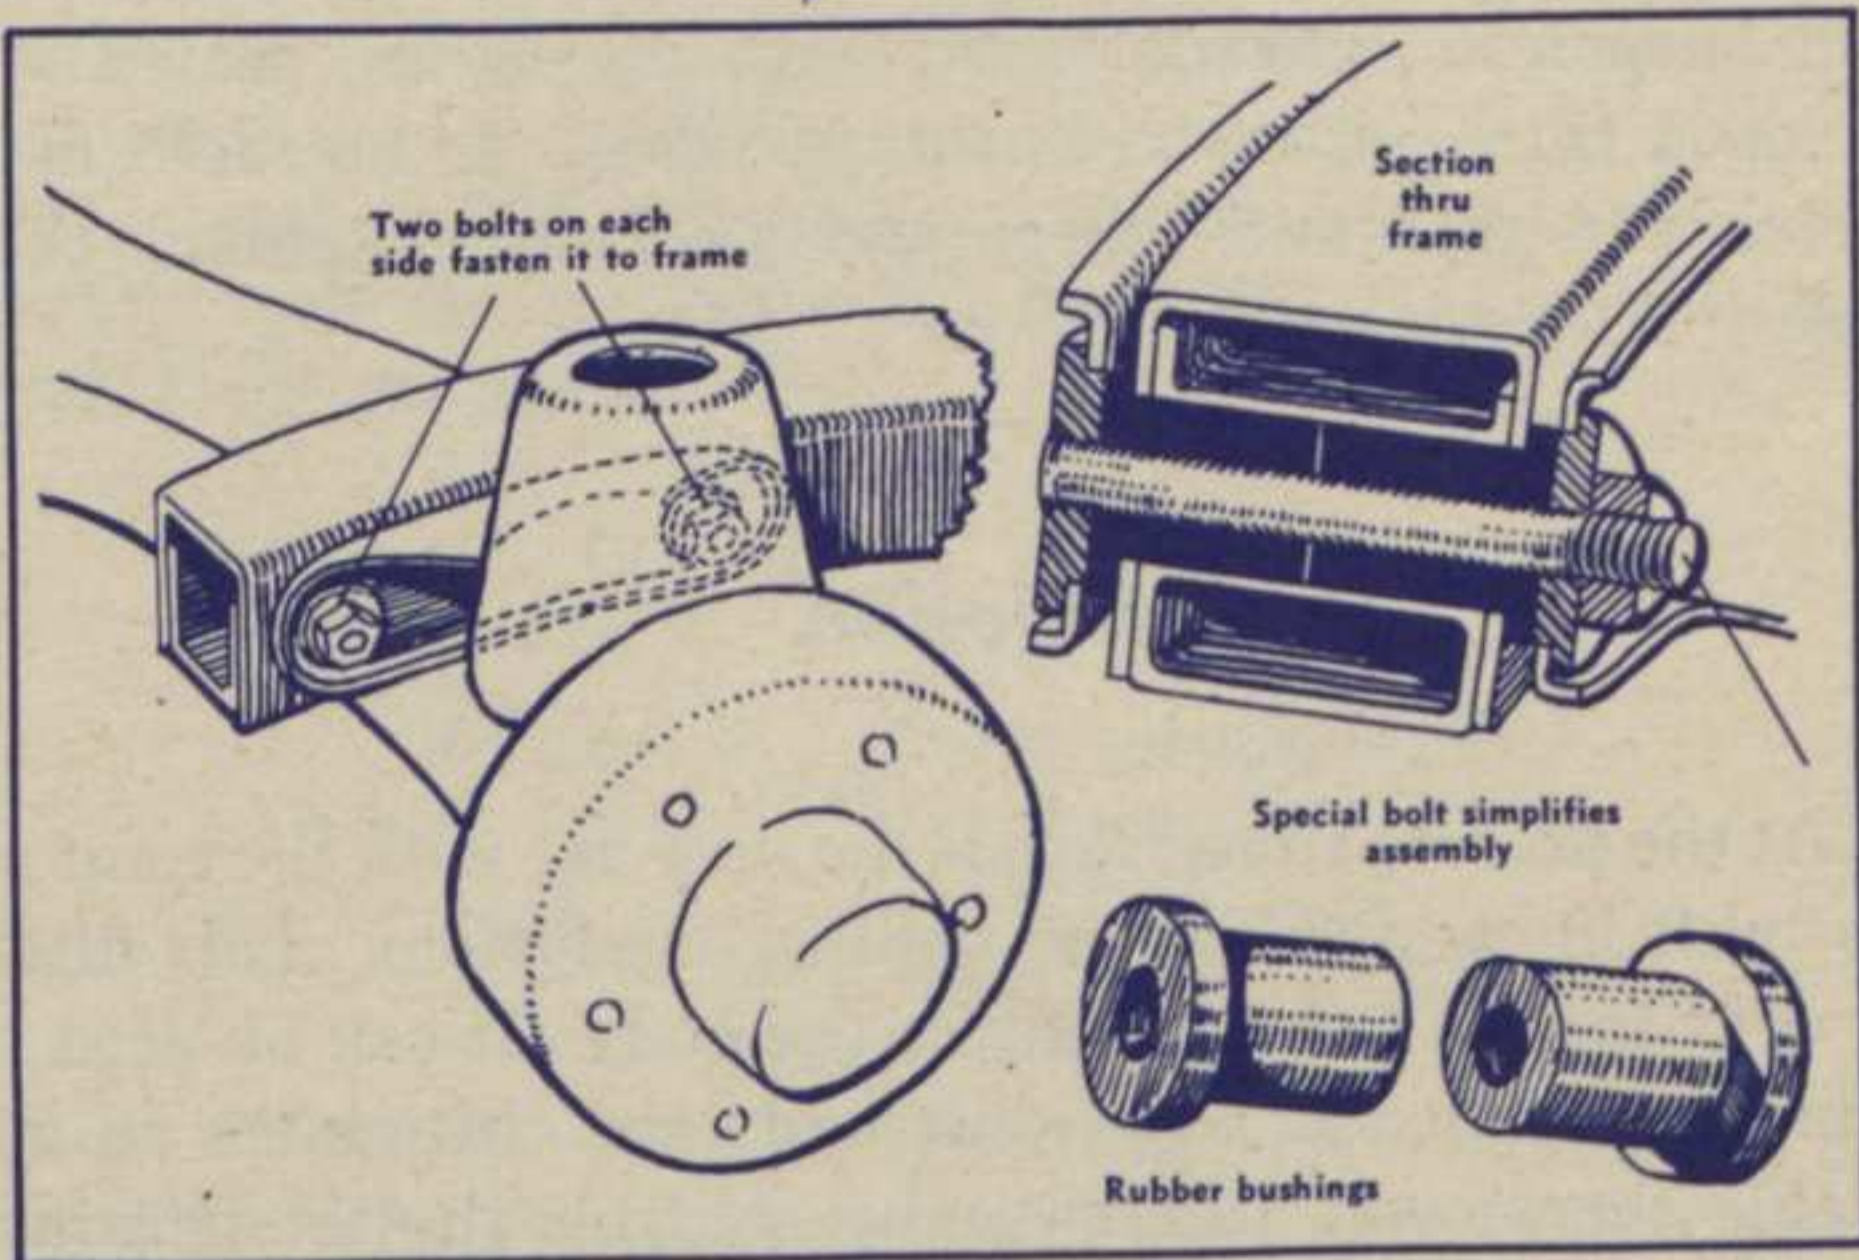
Four rubber encased bolts attach "600" front suspension to body sills.
